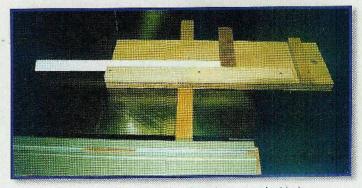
This is the jig that I made to cut the blade guards to the proper length.
